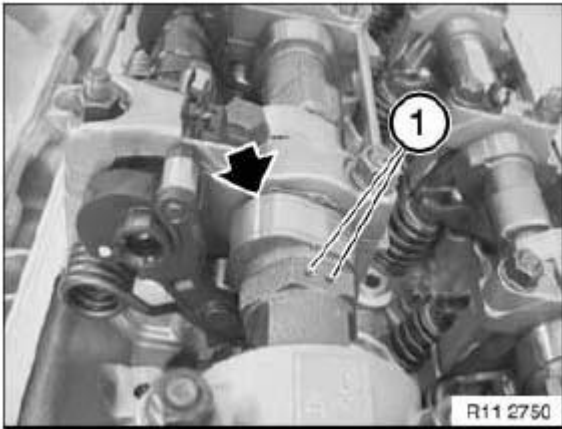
Locating Camshaft Bearing Caps Of Cylinders
